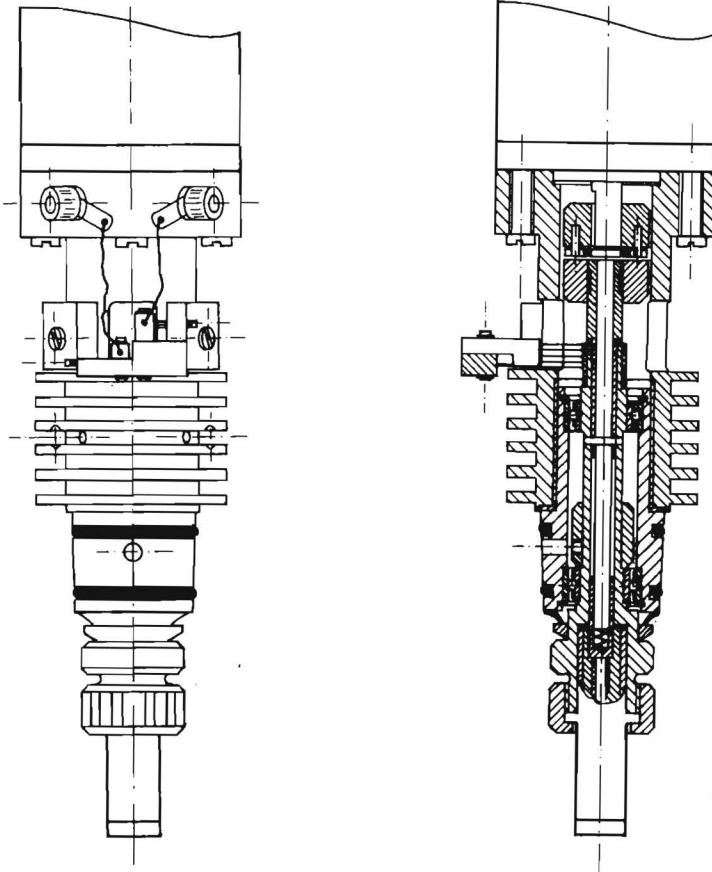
Cross-section of a rotating ring-disk electrode assembly.
